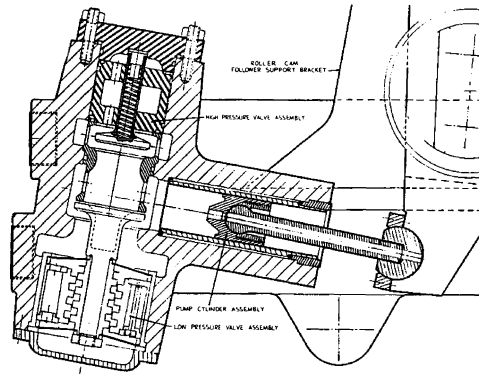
Detail of pump module from the gyro duck ring-cam pump. The upper high-pressure outlet-valve is of conventional passive design. However, the low pressure intake-valve assembly at the bottom features a magnetic bistable latch and marks the beginning of Digital Displacement™ hydraulics. From an unpublished Edinburgh-SCOPA-Laing report to the UK Department of Energy, 1979
